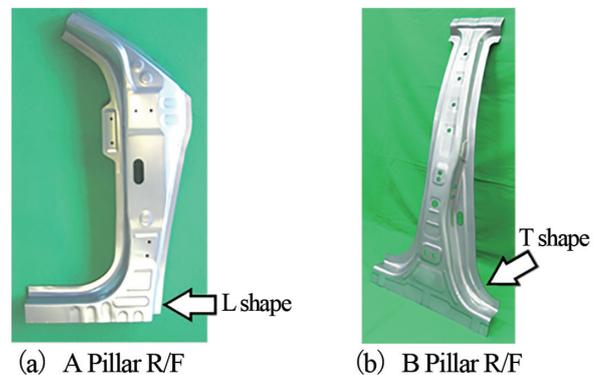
Structural parts formed by Free Bend Sheet Forming<sup>13, 14)</sup>
